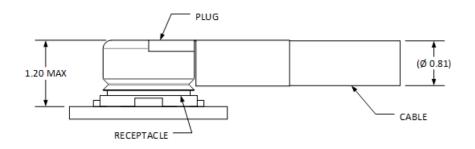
Mated Plug for Ø 0.81 mm Coax Cable
